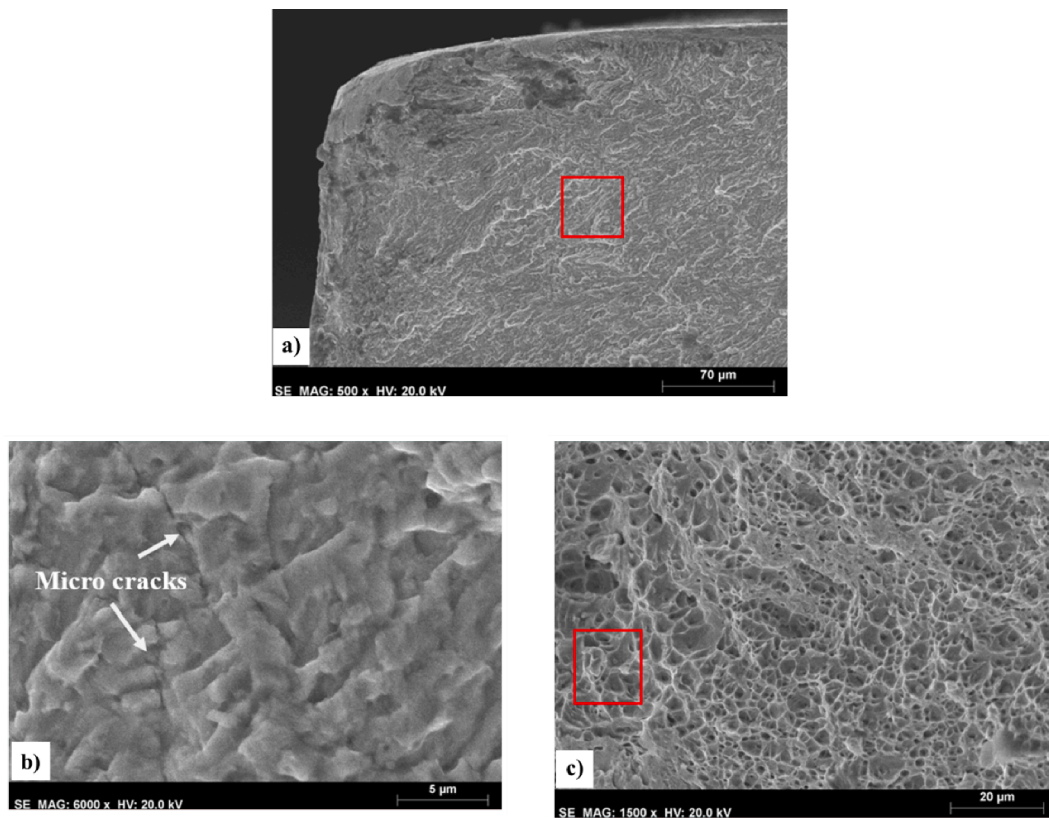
SEM observations of HSLA steel fracture surfaces of 10Lb specimen showing a) crack nucleation, b) micro cracks and c) ductile fracture (dimples and inclusions).
